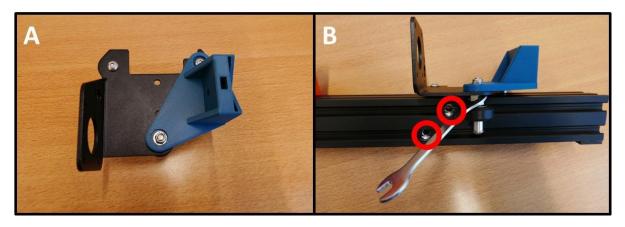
Installing the X Motor Slide Mount. A) 3D printed part mounted on the X Motor Plate. B) Fitting the assembly on the rail.
